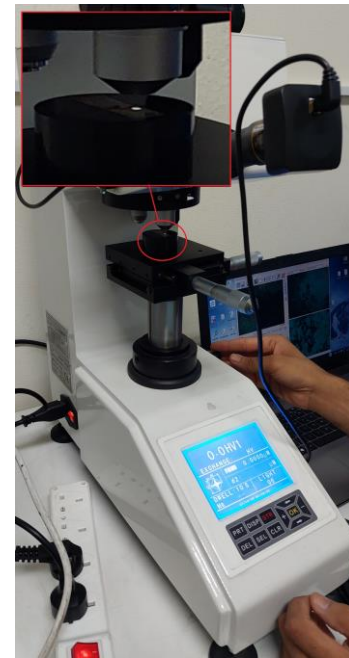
Vickers micro-hardness test for HAZ for a welding sample
